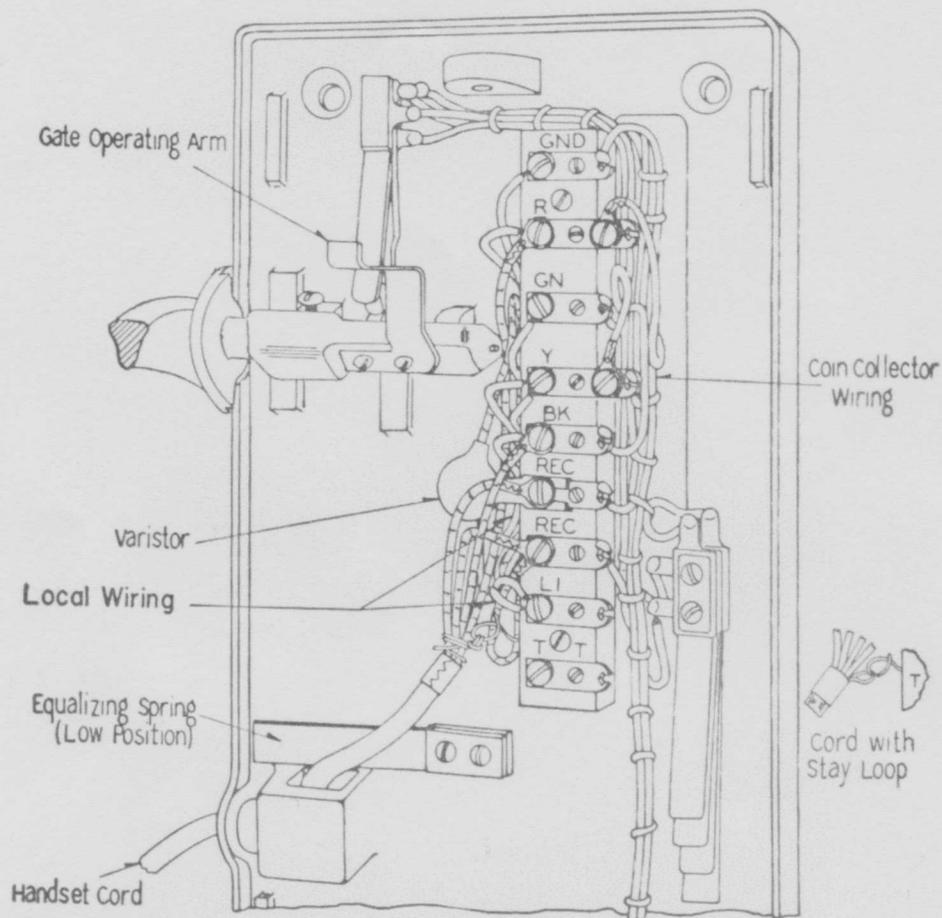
74, 174, or 177-type Coin Collector—Backplate Assembly
